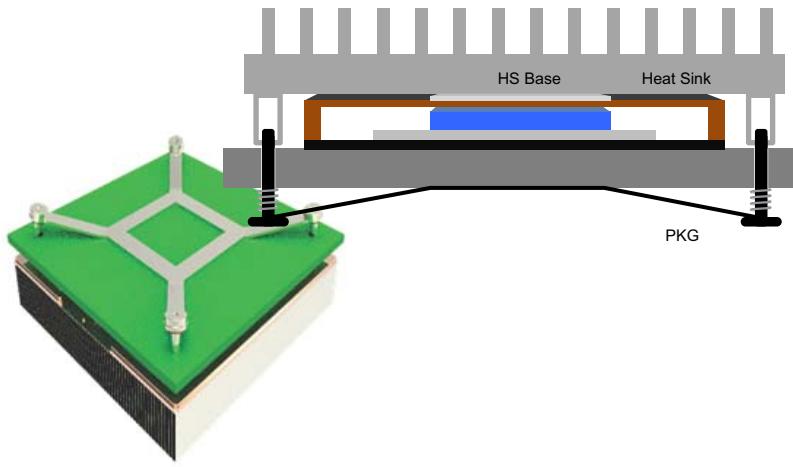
Dynamic Mounting and Bracket Clips on Heat Sink Attachment
